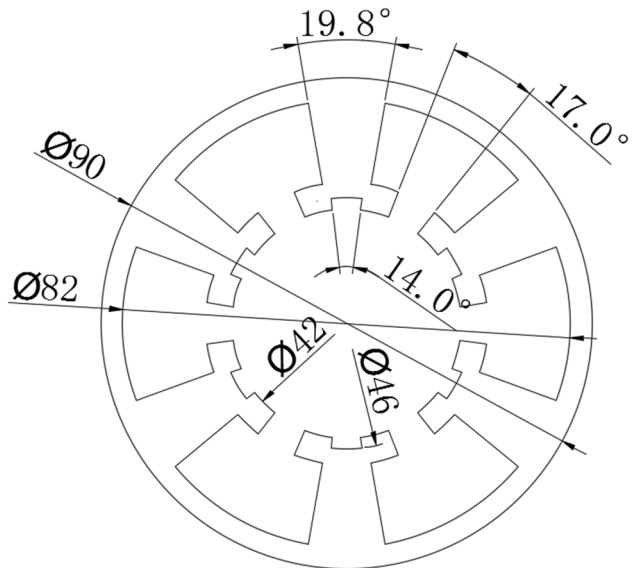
6-slot stator dimensions for 6/10 Vernier machine.
